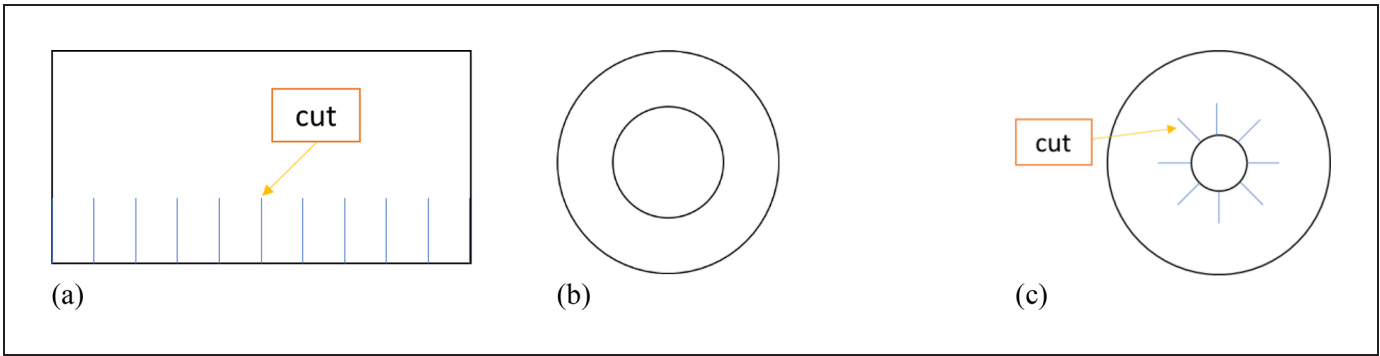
Typical laminate shapes used in the fabrication of FRP flange (a) skirt (b) ring (c) star
